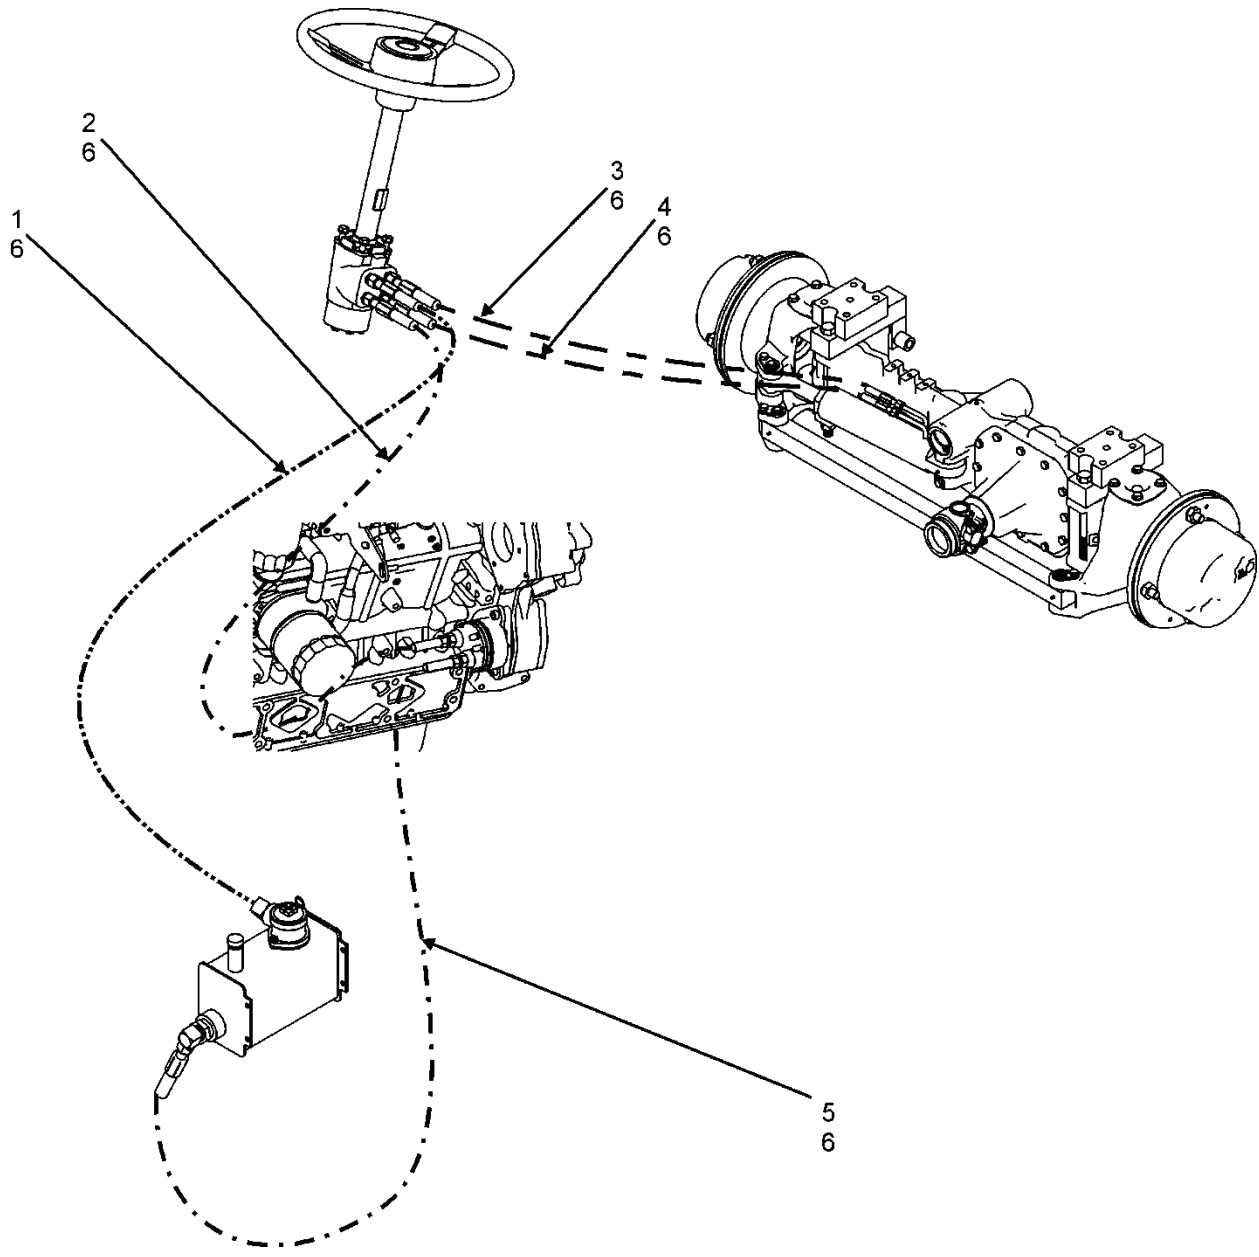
HYDRAULIC HOSE/TUBE ASSEMBLIES
